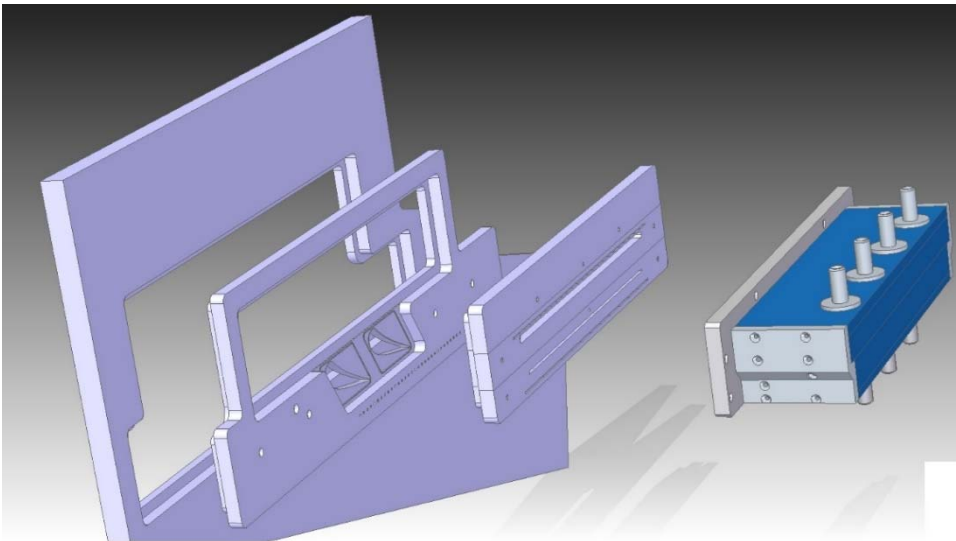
Plenum design and assembly for the purge gap inject slot
